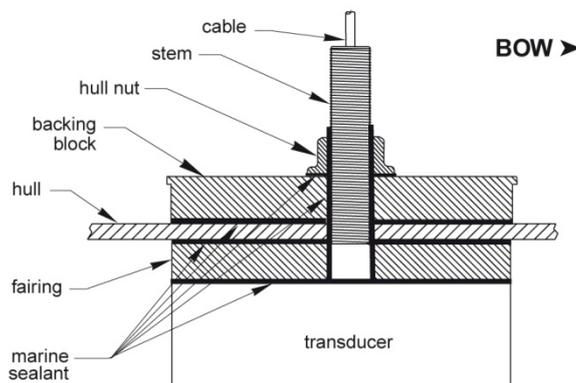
Bedding and installing (SS260 with Std. Fairing shown)
